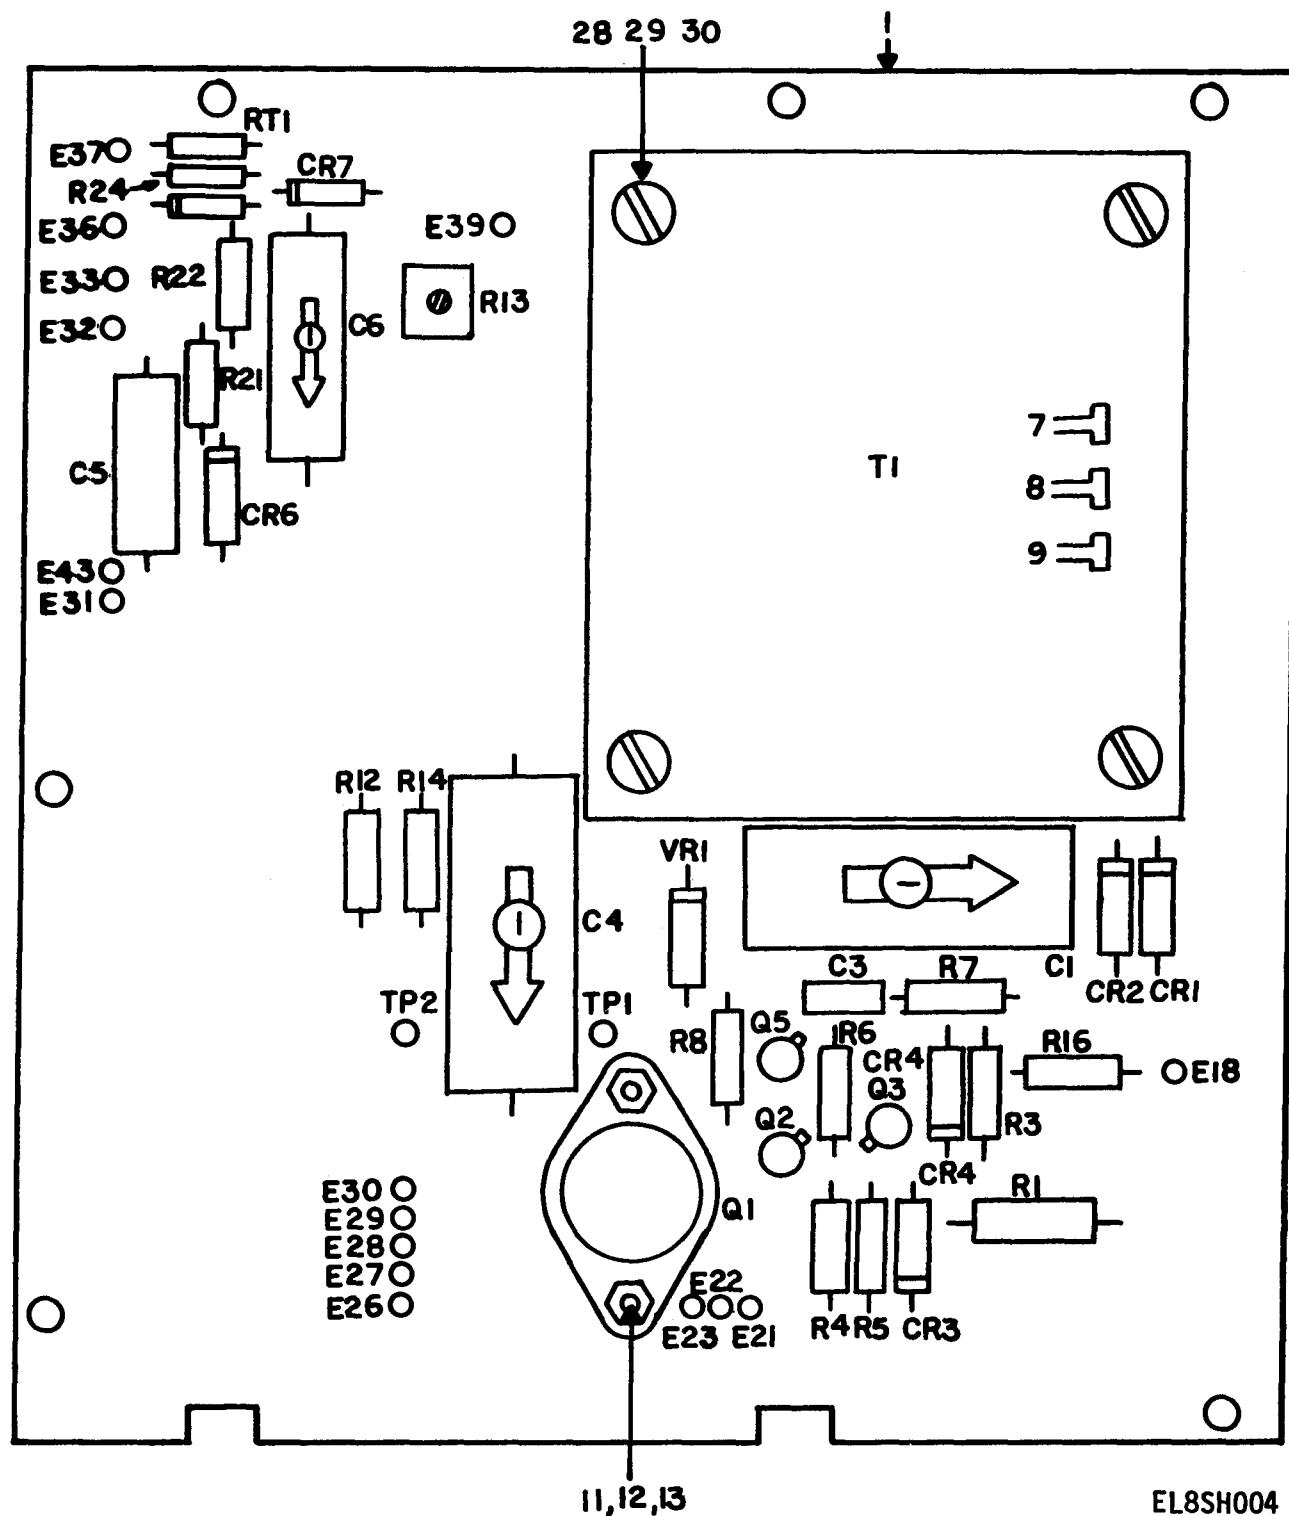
Power Supply Board Assembly (Sheet 1 of 2).
